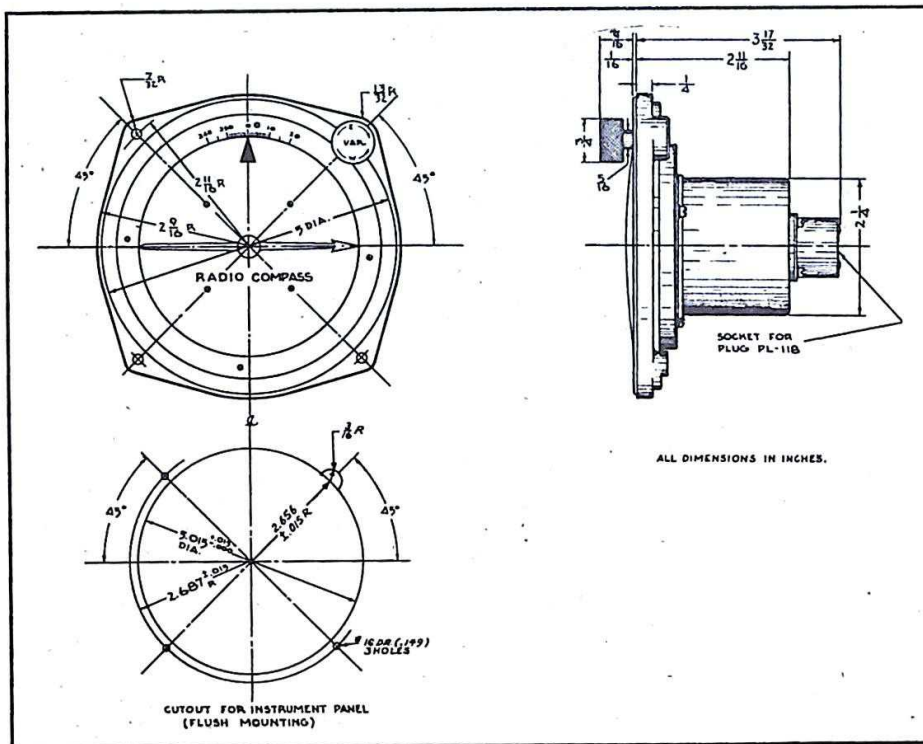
Indicator I-82-A (Navigator's)—Outline Drawing
